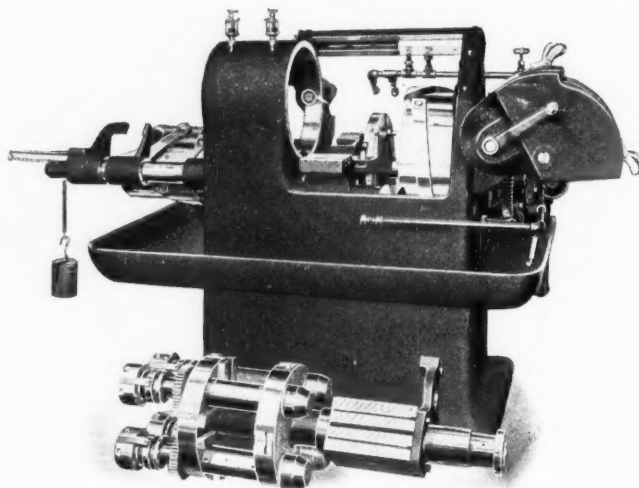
The Machine Partially Disassembled, showing the General Scheme of the Design.
